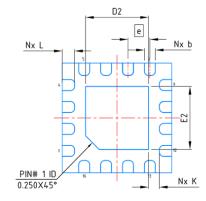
8TR8213 Recommended PCB Layout Footprint
